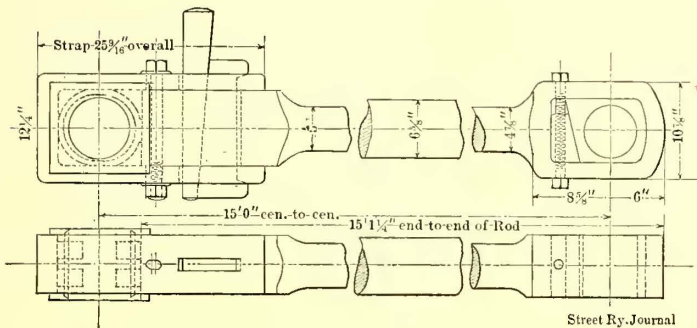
CONNECTING ROD FOR 30 IN. CYLINDER
